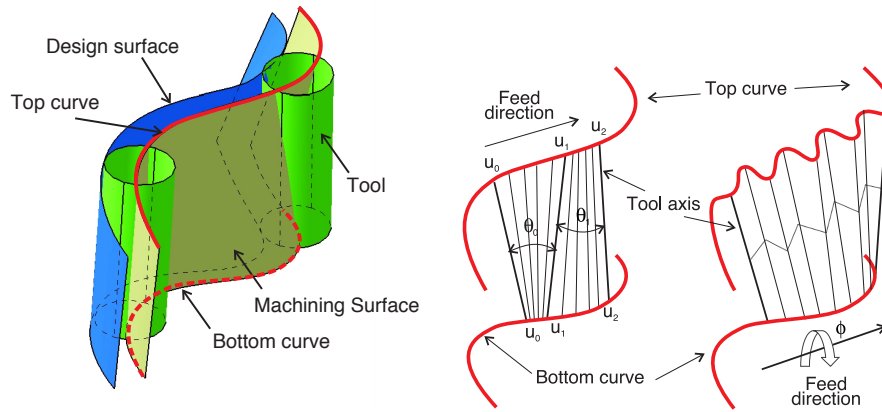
(a) The Machining Surface; (b) Pitch and roll angles
